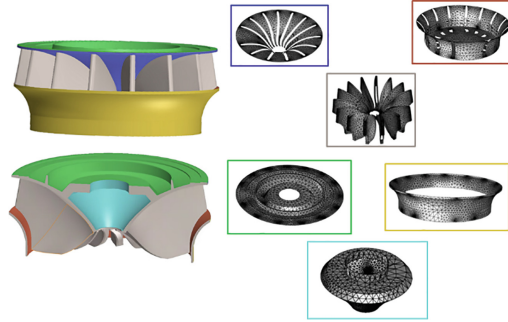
Sectional view of the Francis runner and surfaces of interest.
